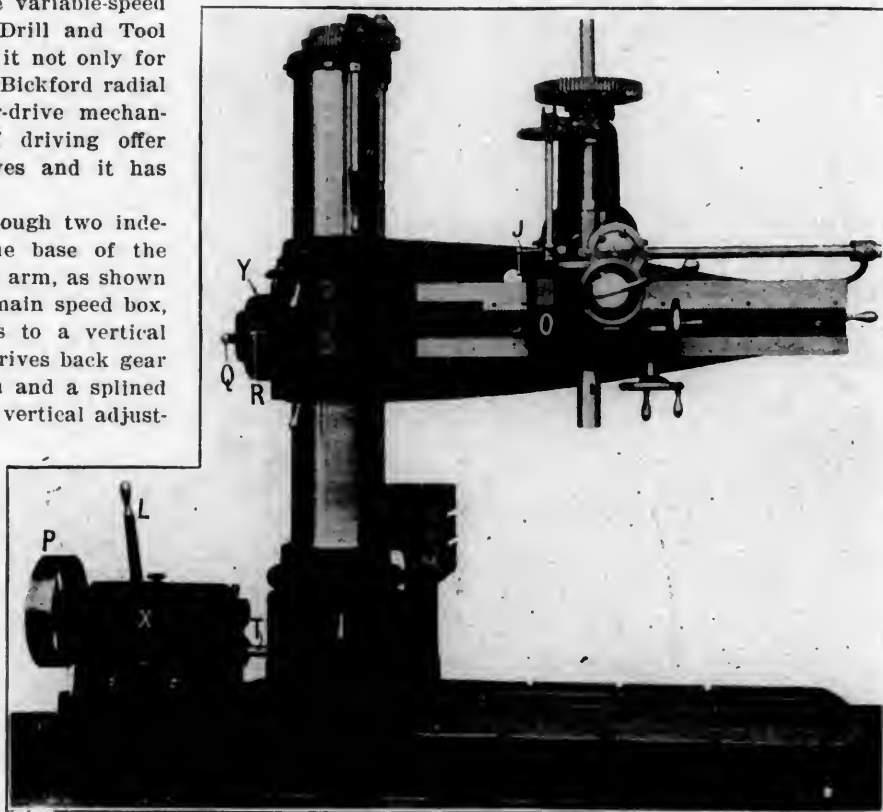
THE BICKFORD RADIAL DRILL, EQUIPPED WITH VARIABLE-SPEED GEARED DRIVE AND FEED.
